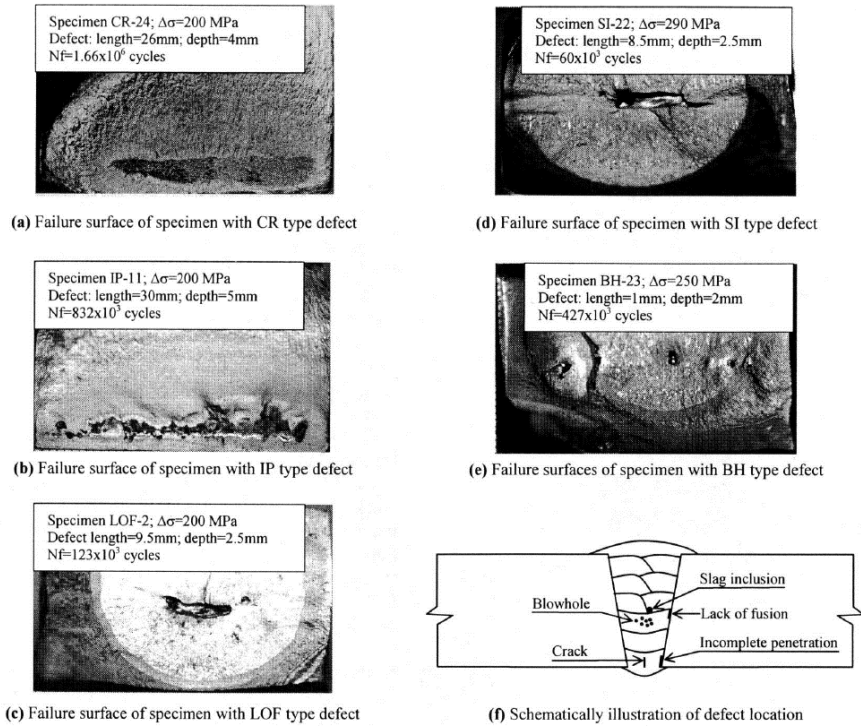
Typical weld defects on fracture surfaces (Miki et al., 2001)
